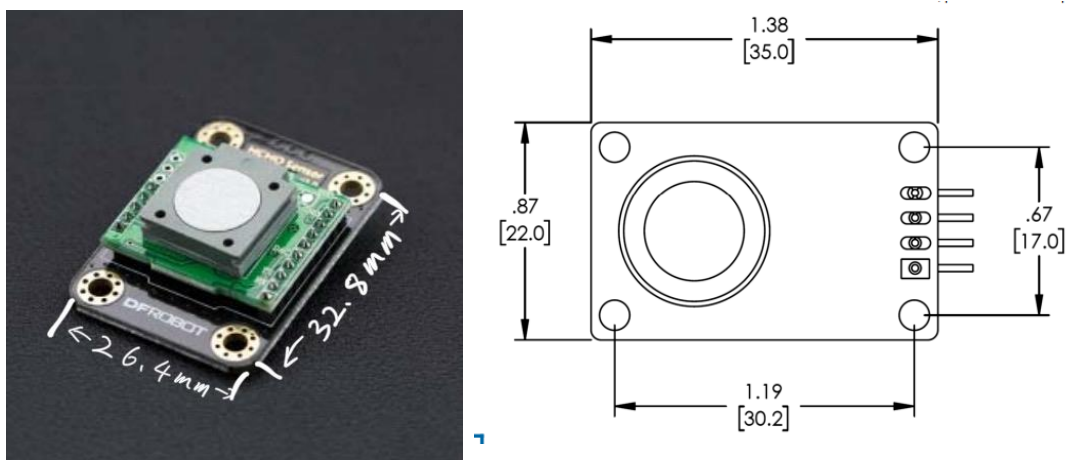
Dimensions for formaldehyde (left) and CO (right) sensor
